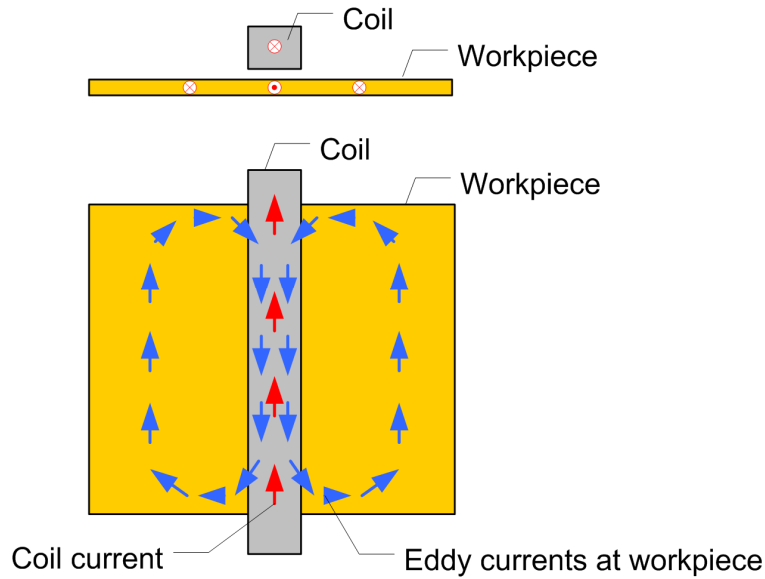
Induced currents with respect to EMPT sheet welding
